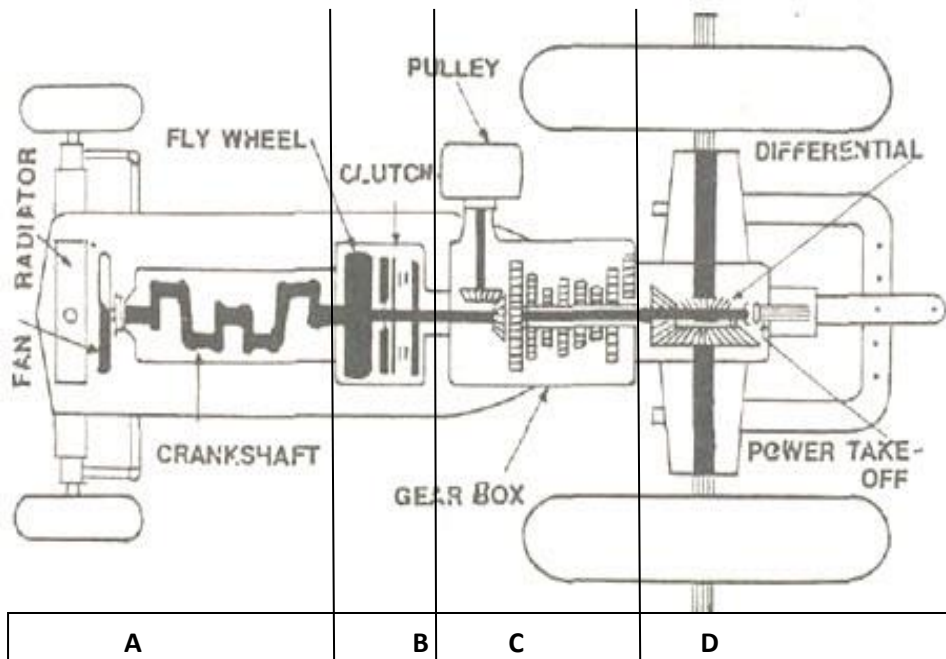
Illustration of the tractor transmission system<sup>35</sup> (where A=Engine Block; B=Clutch Assembly; C=Gear Box; D=Differential unit)
